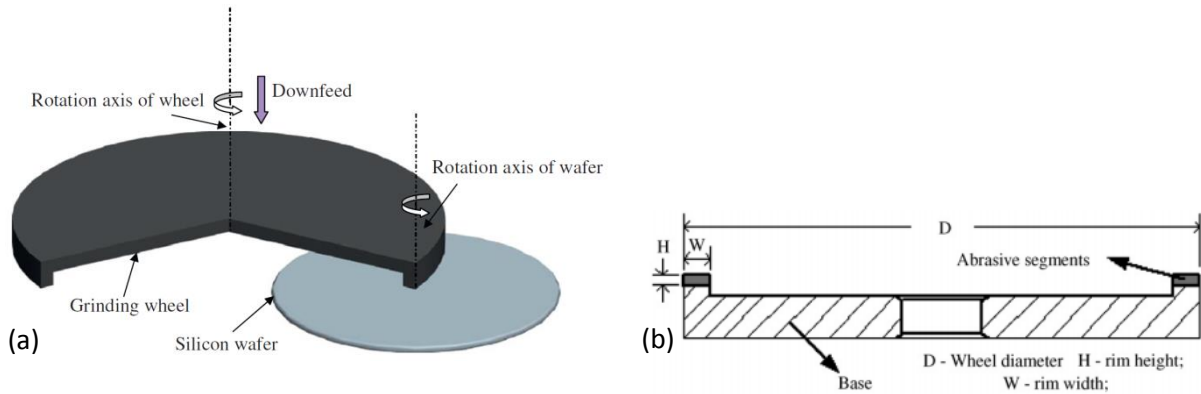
Illustration of a grinding process (a) [Pei08] and cross-sectional representation of a grinding wheel (b) [Liu07].
